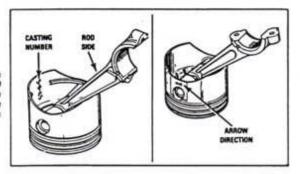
Connecting rod assembly used on Models HH80, HH100 and HH120.
